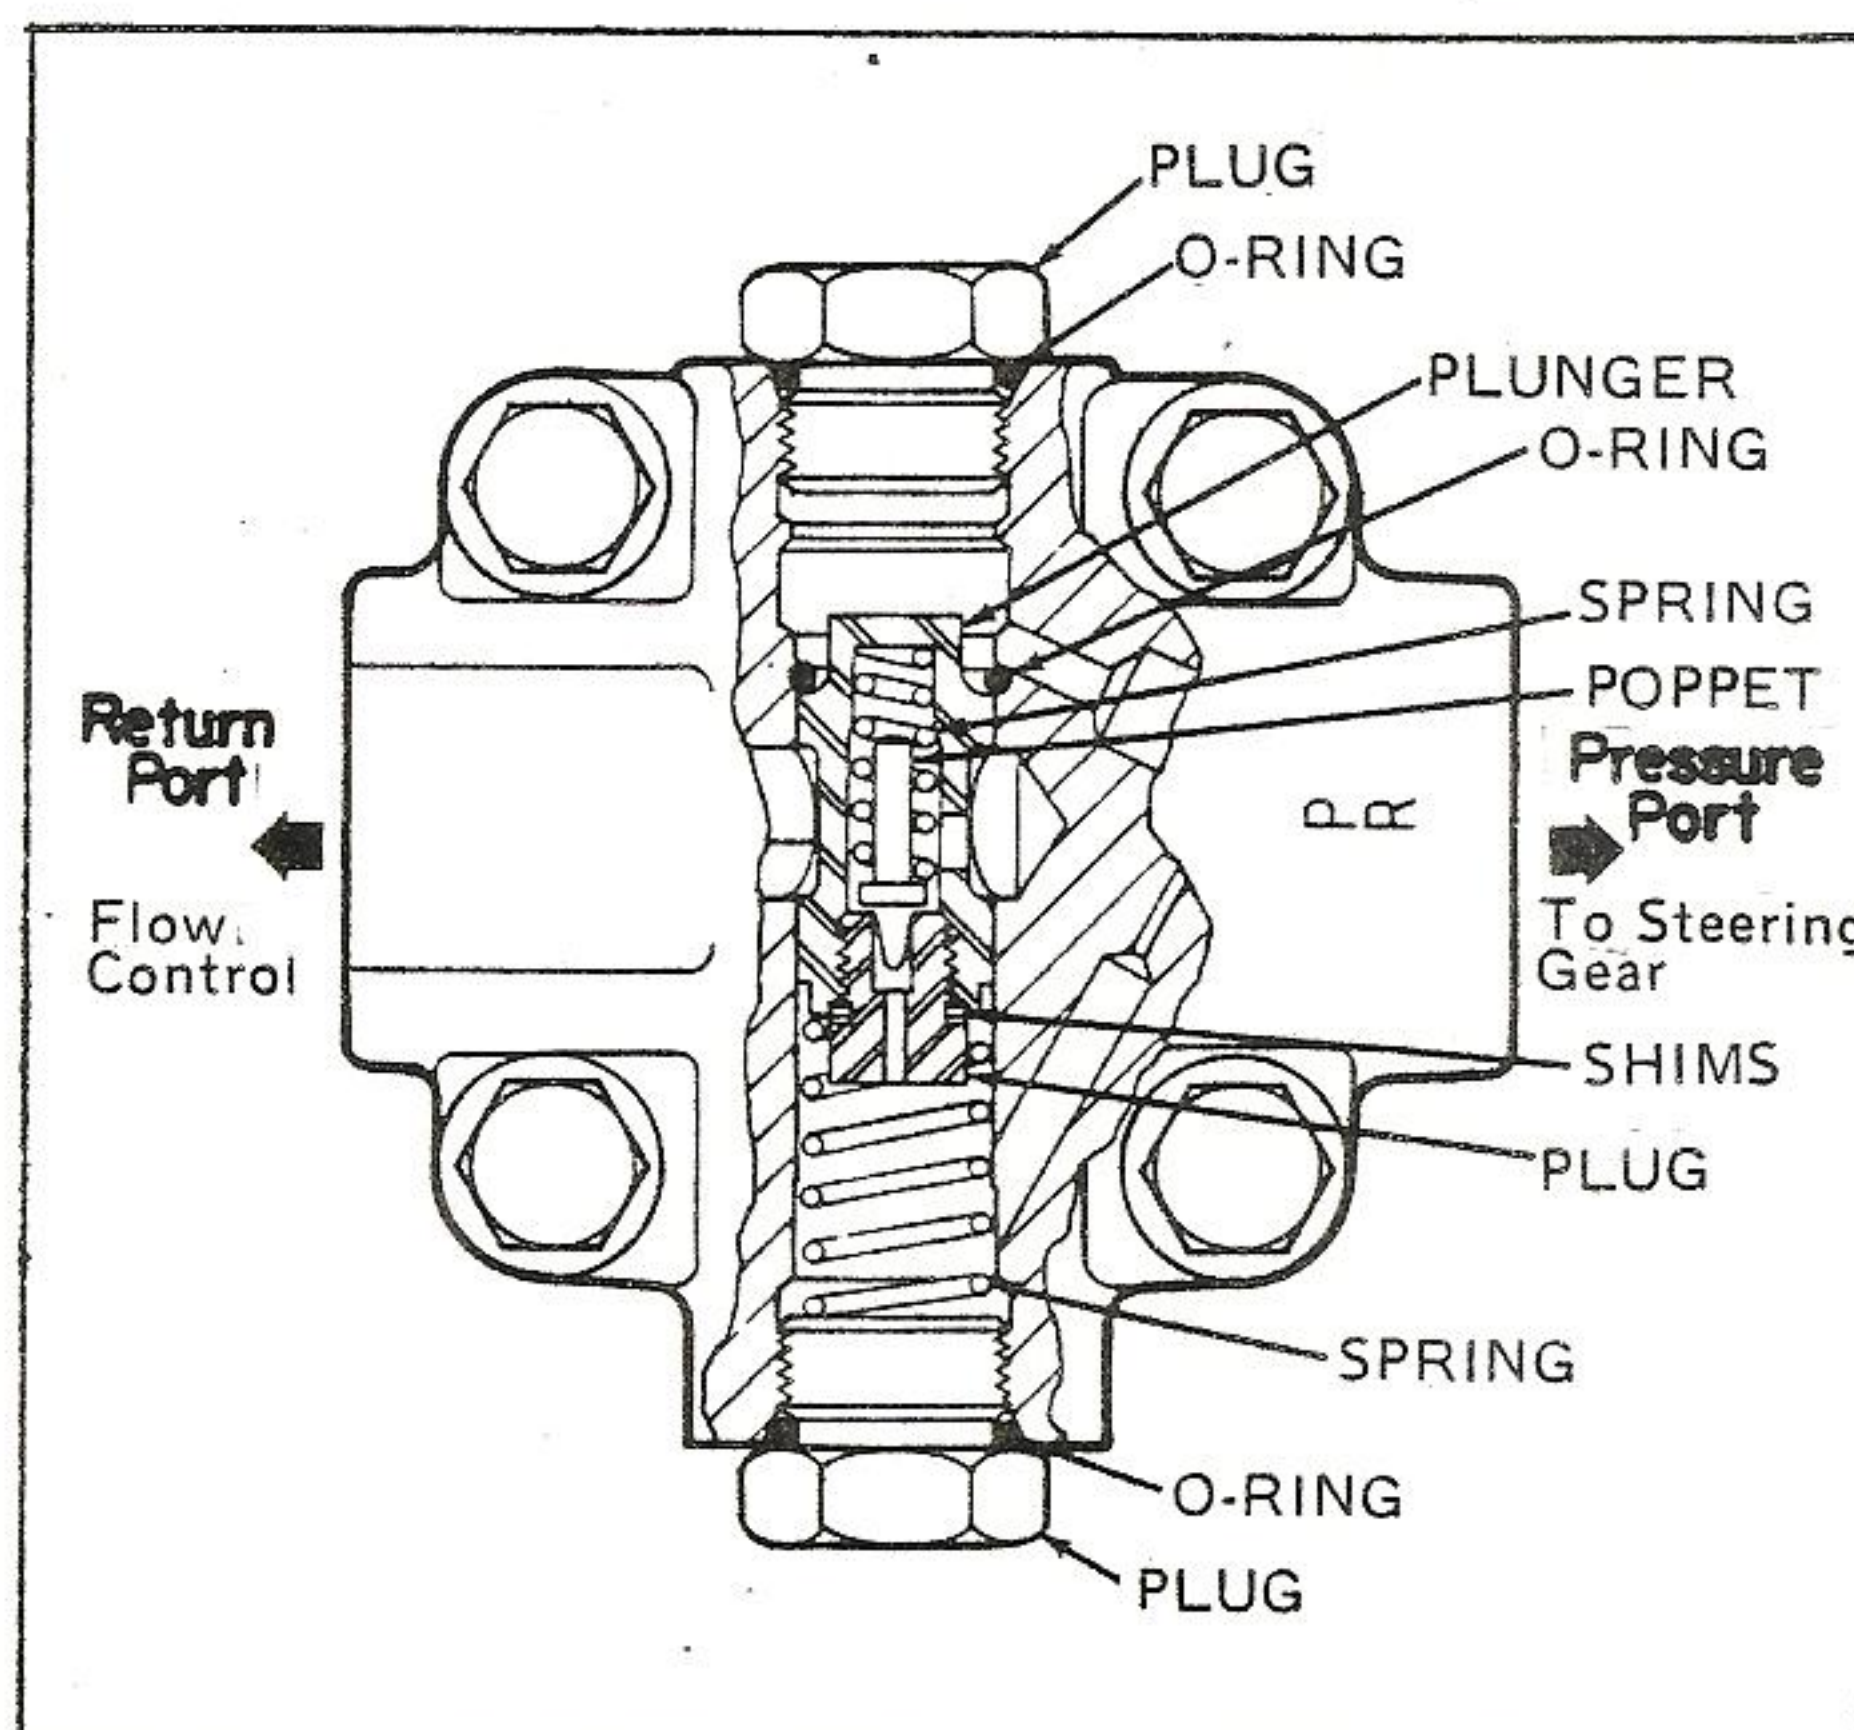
3. CROSS SECTION OF STEERING SYSTEM RELIEF VALVE (LOCATED IN IMPLEMENT PUMP)
